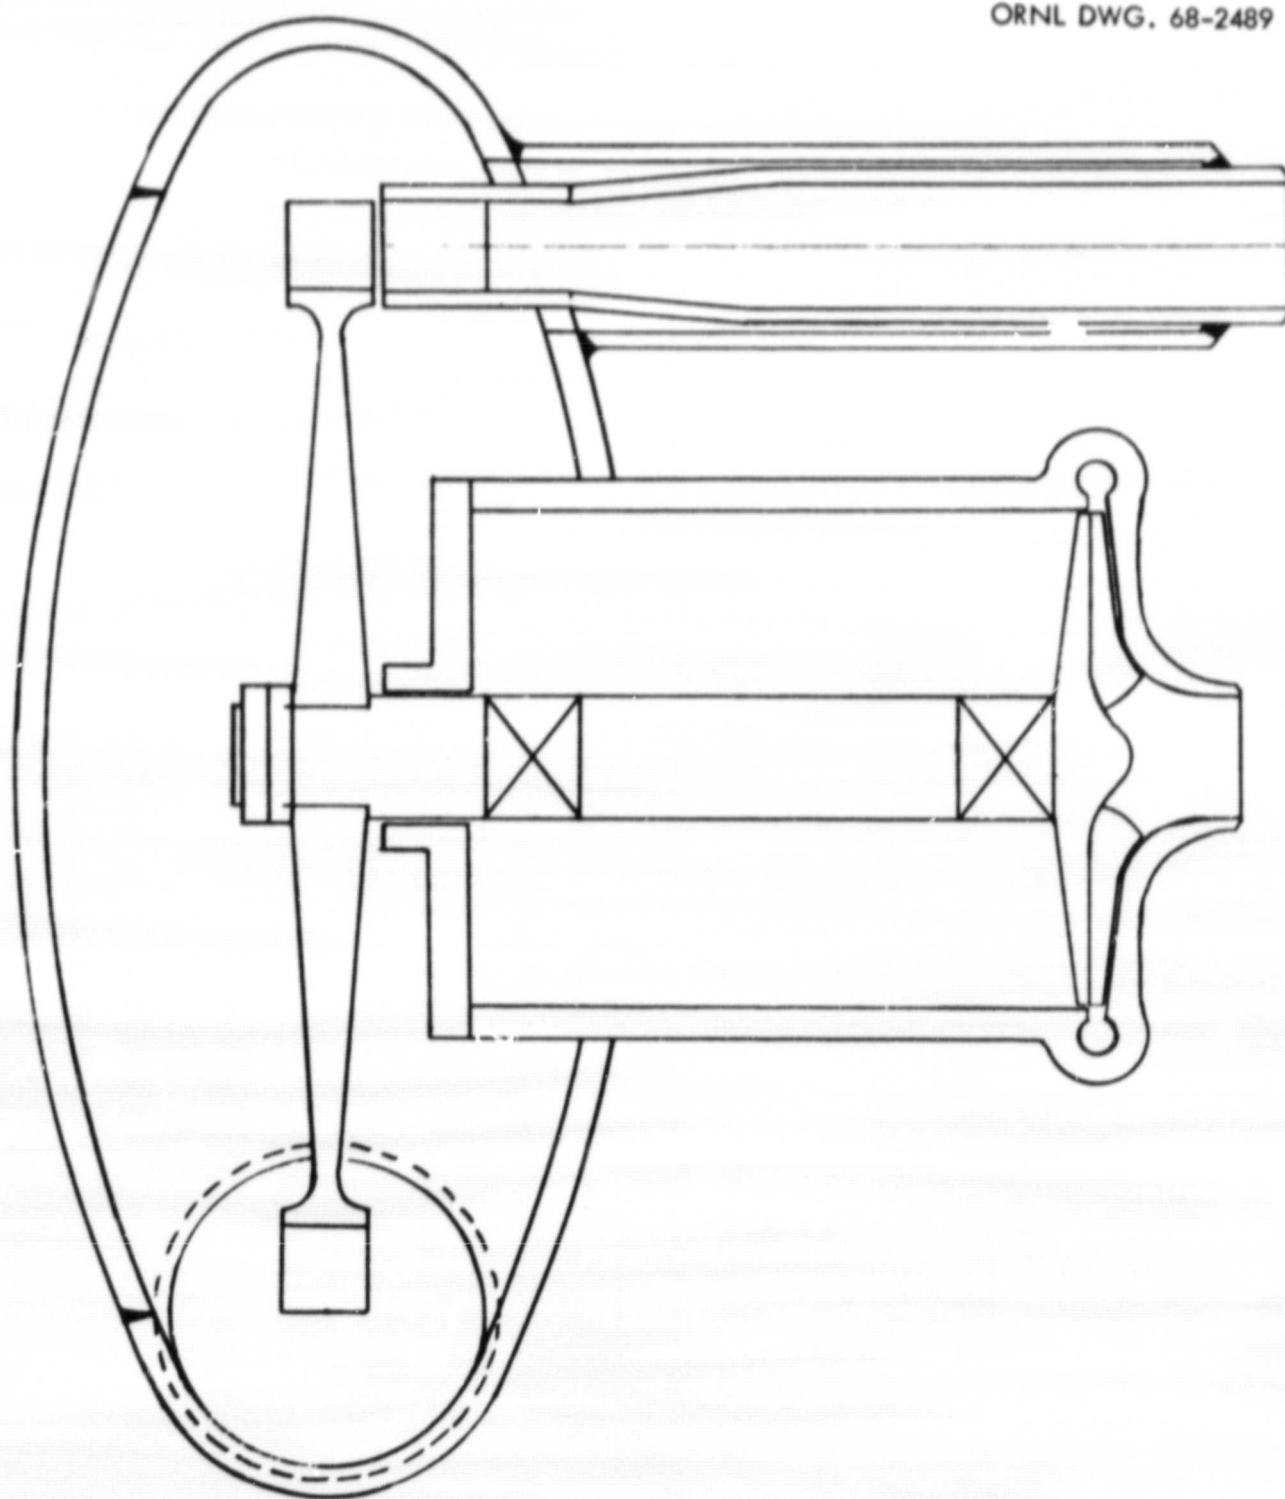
Cross Section of the Preliminary Design of the Free Turbine-Driven Pump for Cesium Boiler Feed Application. Shaft speed, rpm - 12,000; Turbine wheel diam, in. - 8.6; Impeller diam, in. - 4.1; Turbine-pump weight, lb - 85.
